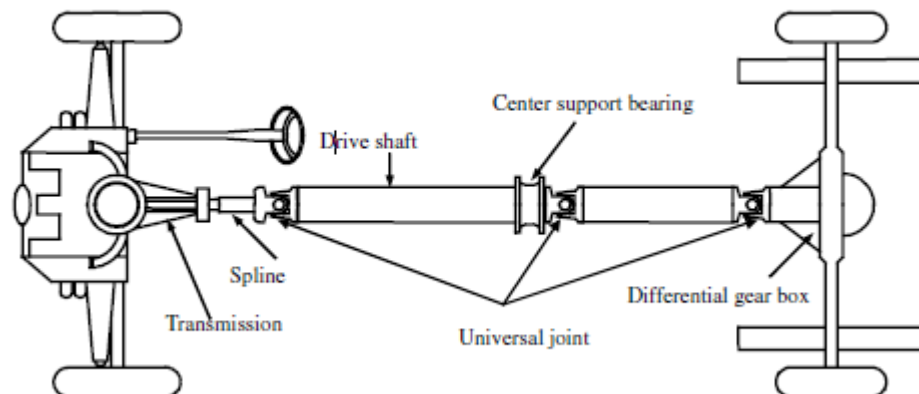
Schematic diagram of the conventional two-piece steel drive shaft for a rear wheel driving vehicle.
